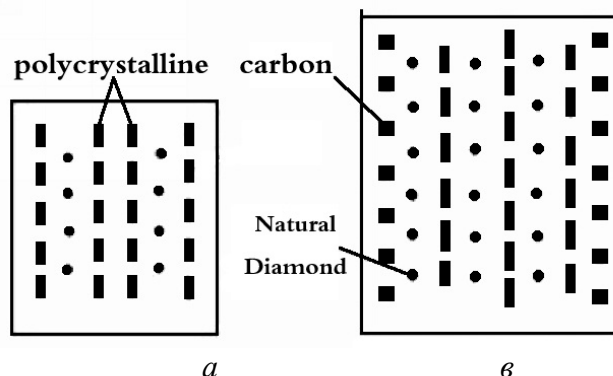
Inner and Outer Gauge (A) gauge protection of ID, (B) gauge protection of OD
